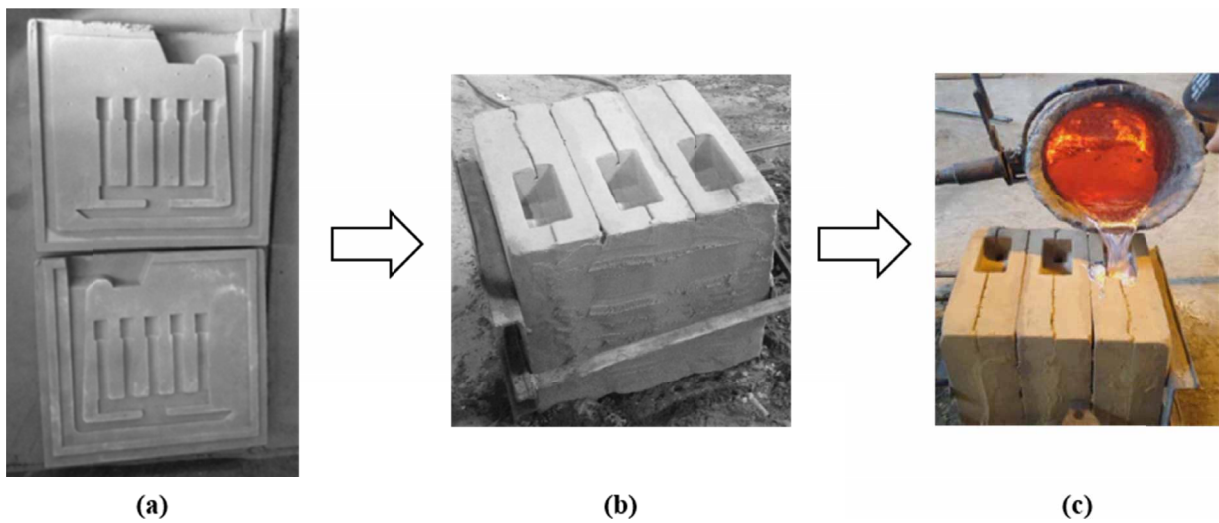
Molding and pouring process (a) mold right and left halves (b) mold assembly and (c) pouring aluminum melt
